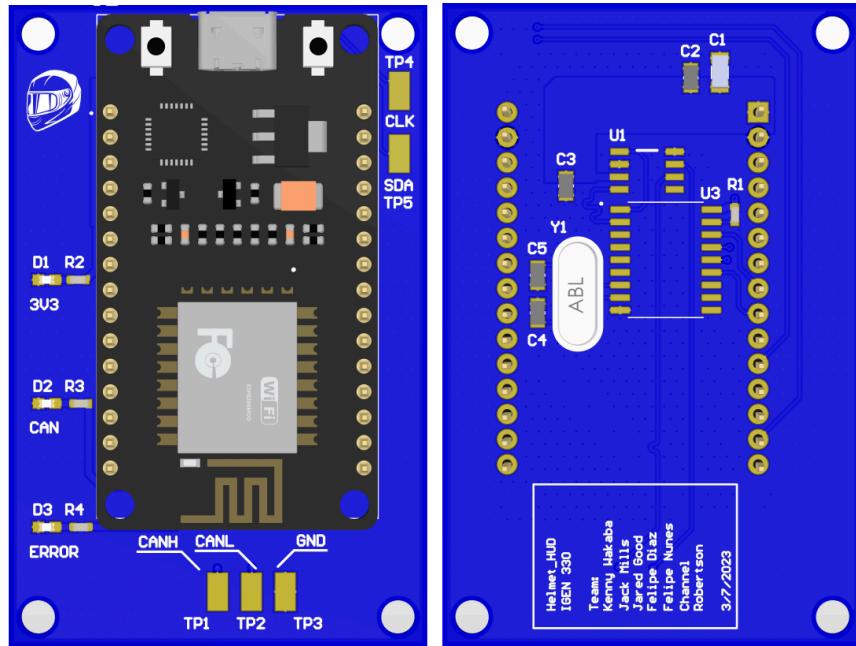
Top (Right) and Bottom (Left) Layer of the PCB.
